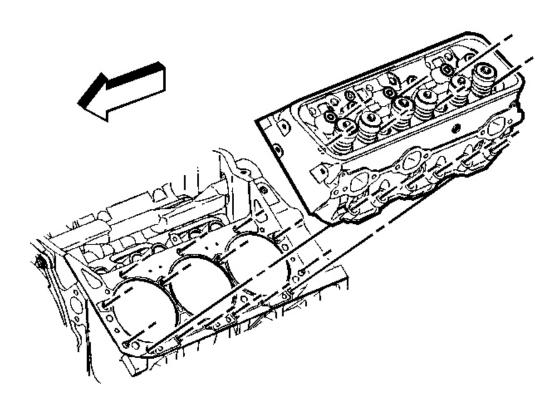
Removing/Installing Cylinder Head (Left) Courtesy of GENERAL MOTORS CORP.
